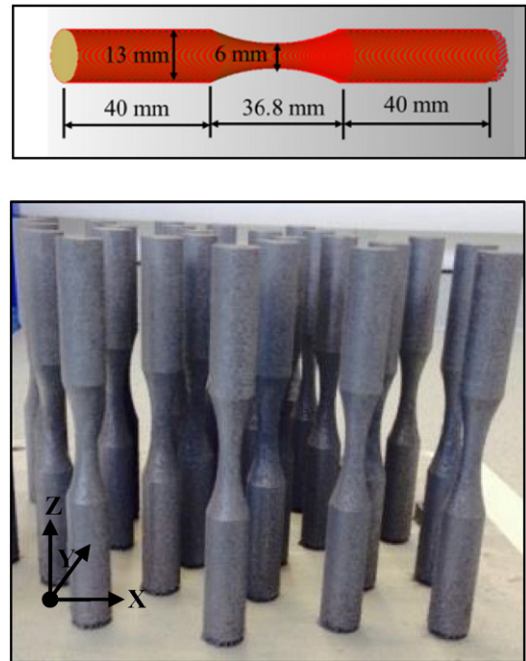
Fatigue samples fabricated using SLM with the build direction parallel to the Z-axis.
